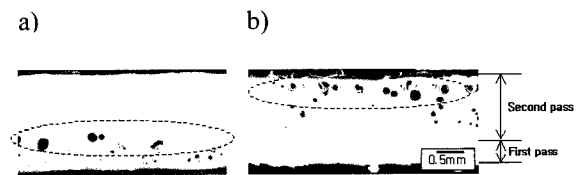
Inner cavities in longitudinal section of weld
